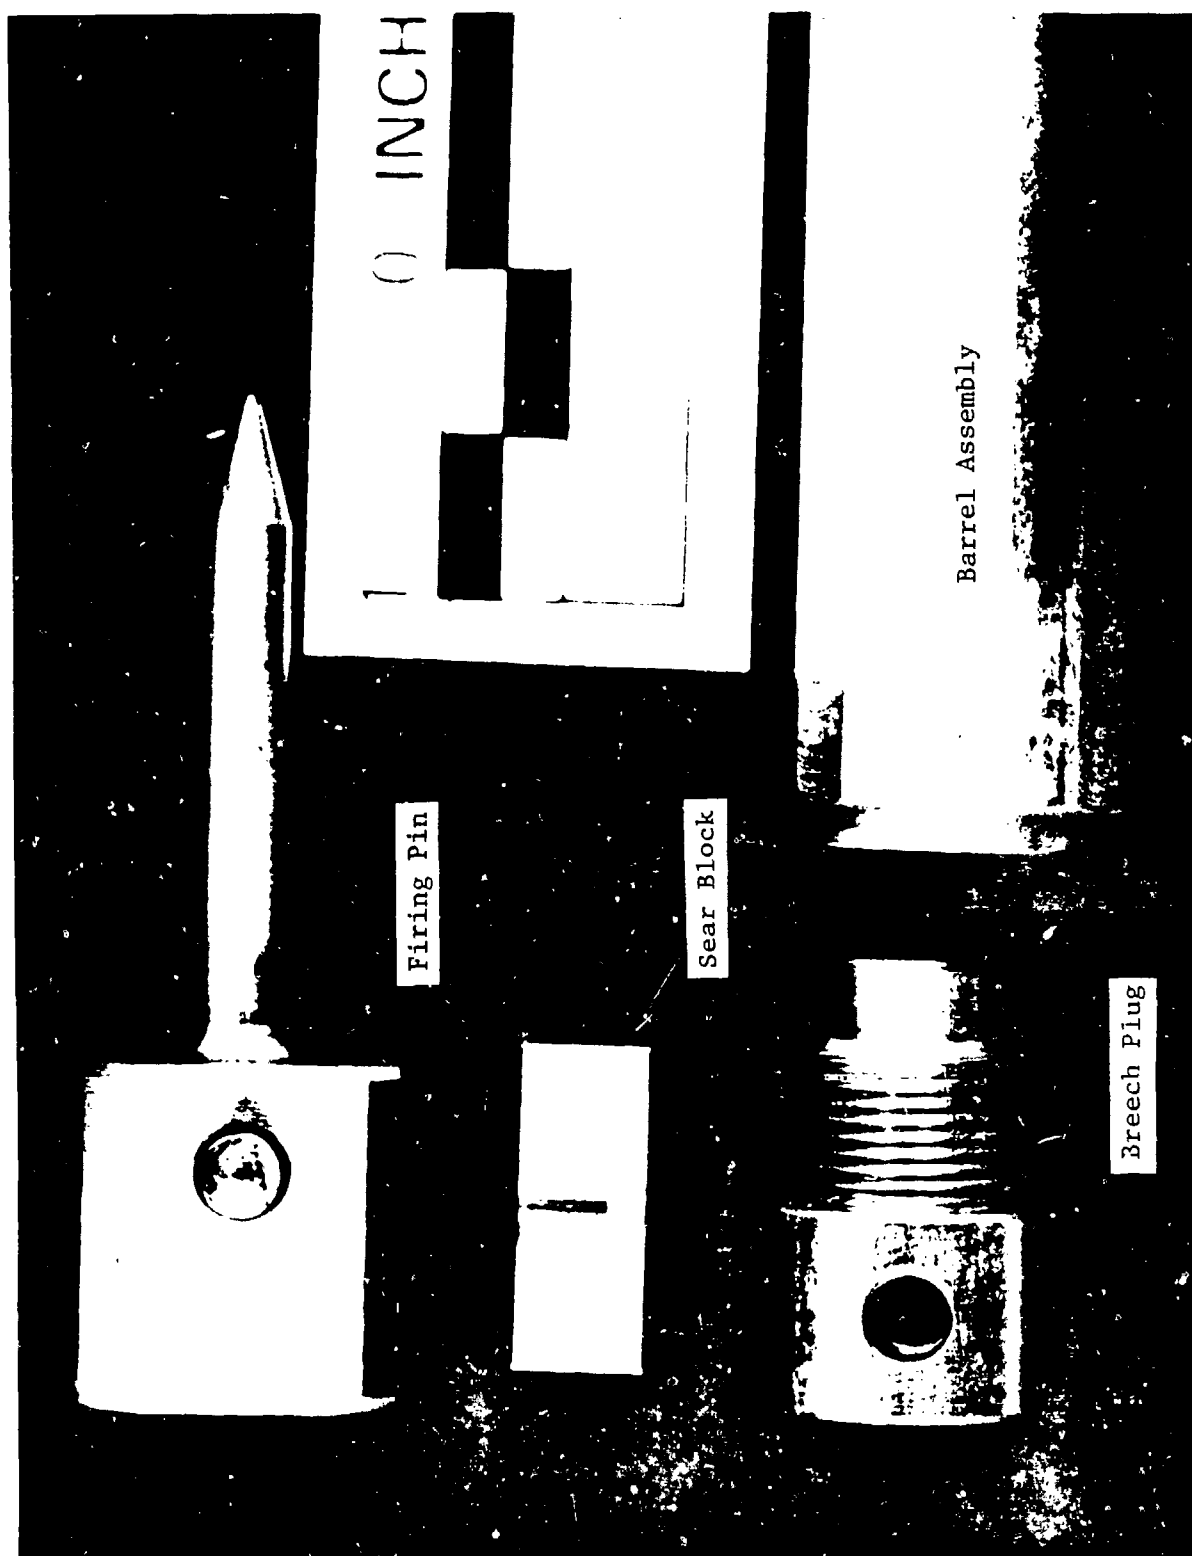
Firing Pin, Sear Block, Breech Plug and Assembly.
